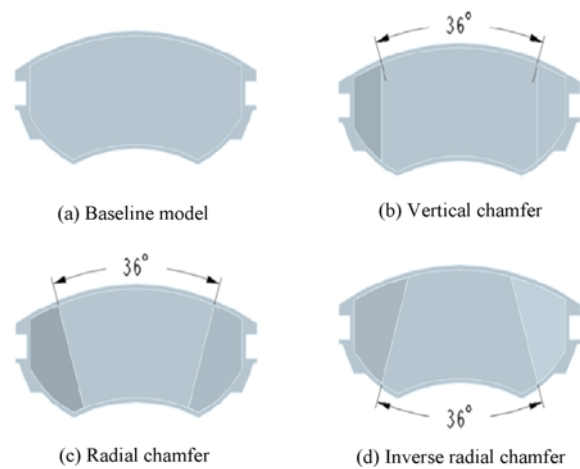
Baseline shape and the other three shapes of the pad chamfer.
